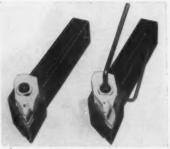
Two views of tracer type Carboloy Adjust-O-Breaker toolholder, showing extremes of breaker position adjustment
